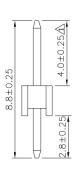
2mm Pin Header Technical Drawing (for SM5210-MINI)
